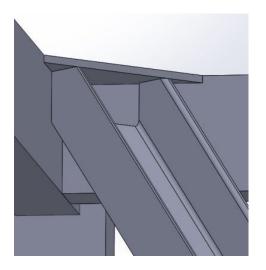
Upper Weld Joint (3D CAD Model)
